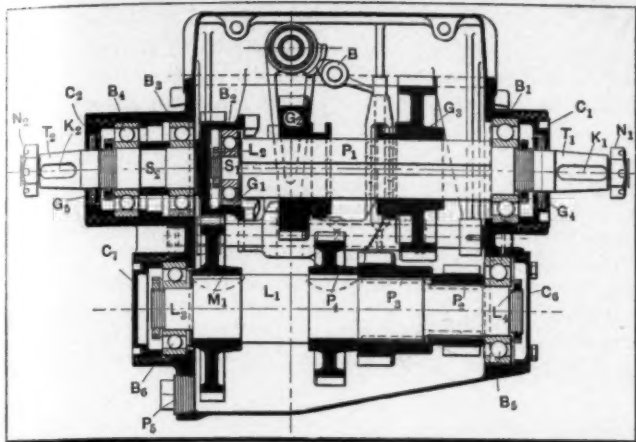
Section of the transmission gear of the selective three-speed type with stout spindles centered on F. & S. annular ball bearings
